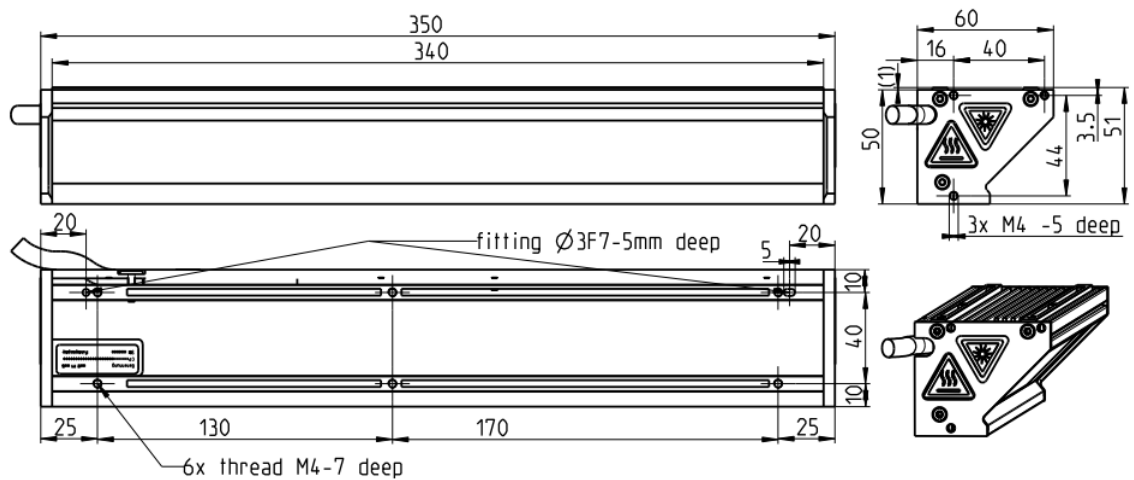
Mechanical mounting with fitting and threads for reflector types A, B, C and D
